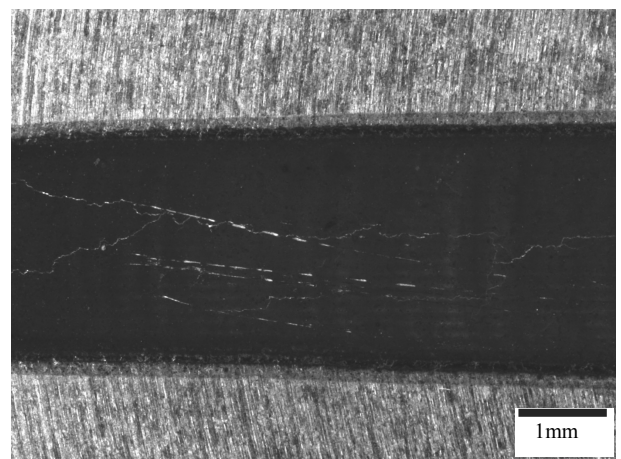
Surface of the laser tray face after remelting with 1.5 kW laser power, AlSi9Cu4 cast alloy
